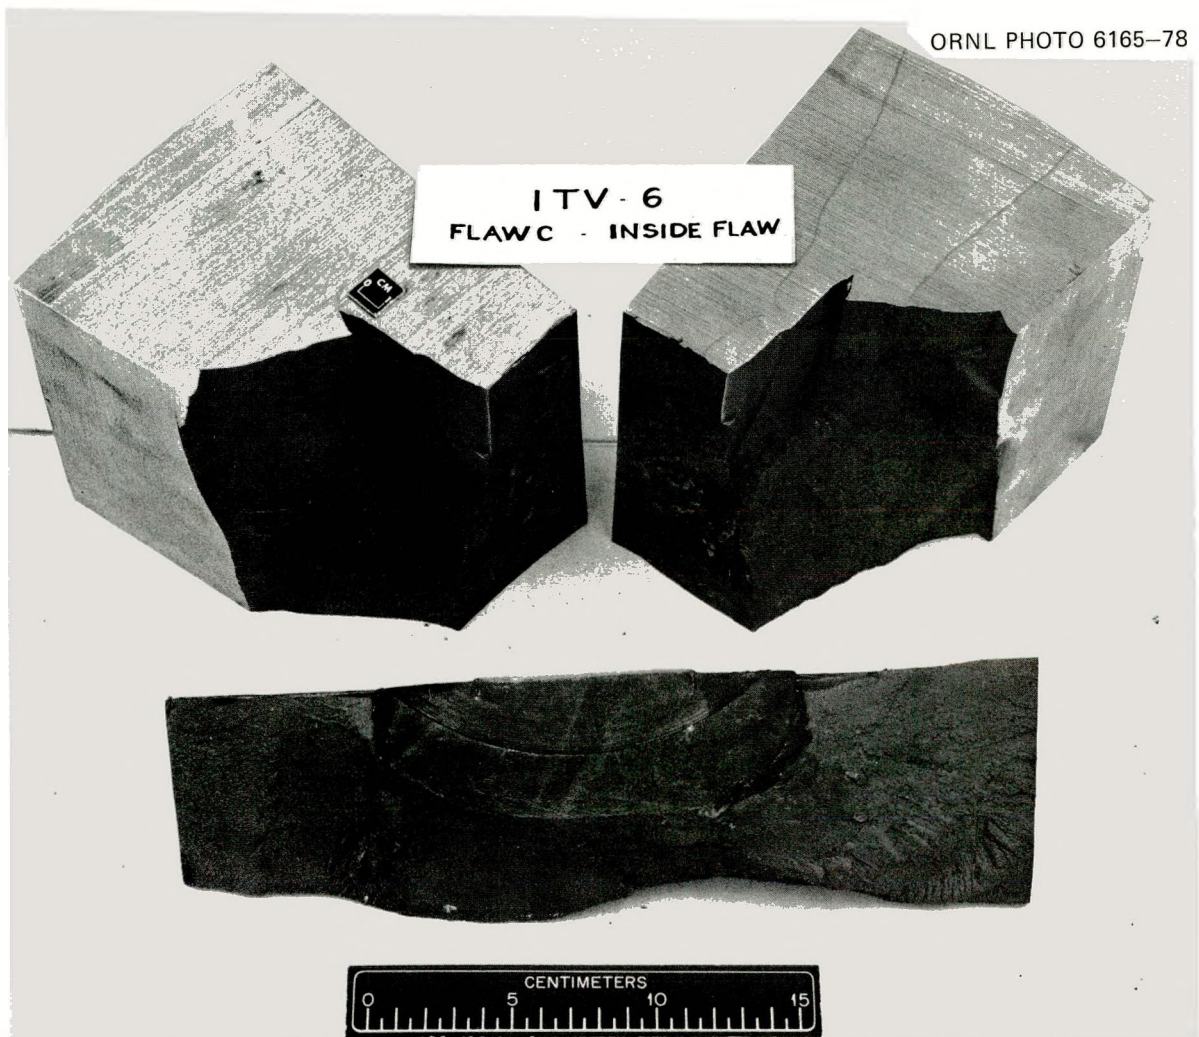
Fracture surfaces and flaw profile of flaw C from intermediate test vessel V-6.
